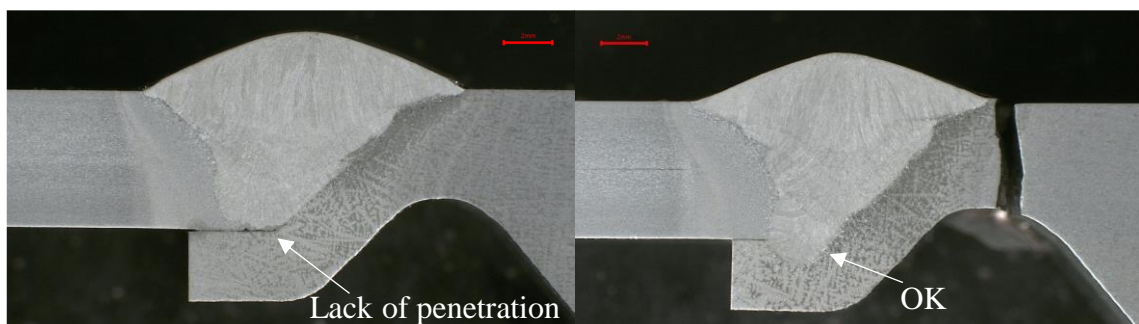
Weld penetration on 96G26_FB2 test specimen. Sample on the left is taken from removed weld start wing and a sample at the right is taken middle of the specimen after fatigue test.
